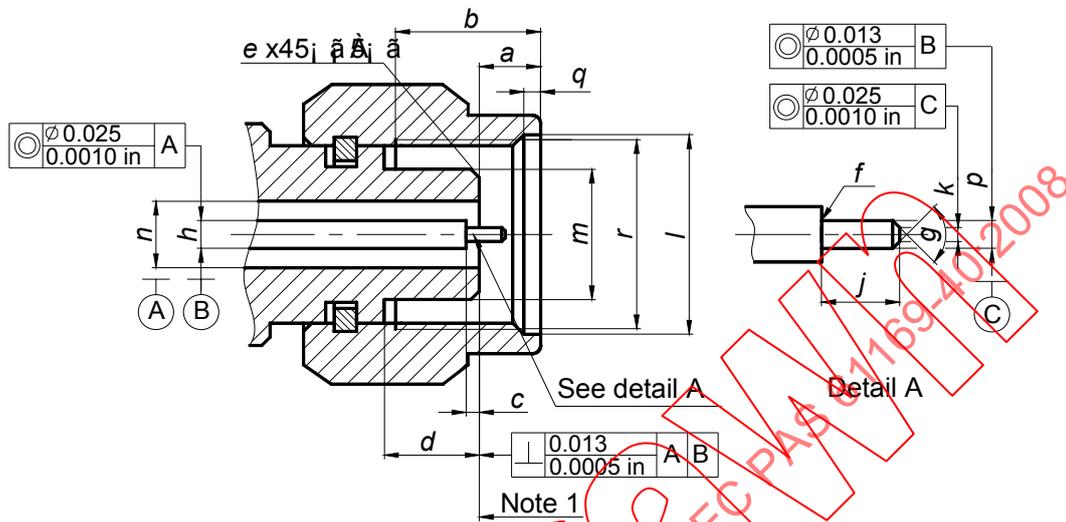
Connector with pin-centre contact (for dimensions, see Table 4)
